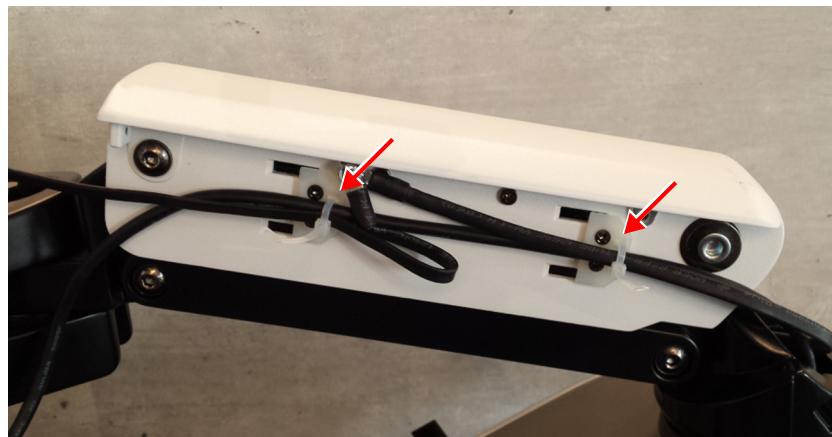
Arm Side Cable: Removing Tie Wraps
